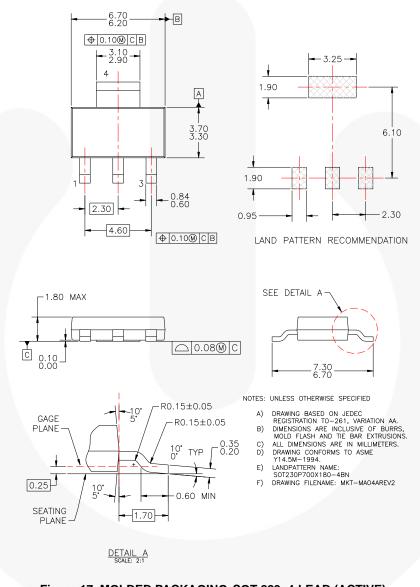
MOLDED PACKAGING, SOT-223, 4-LEAD (ACTIVE)
